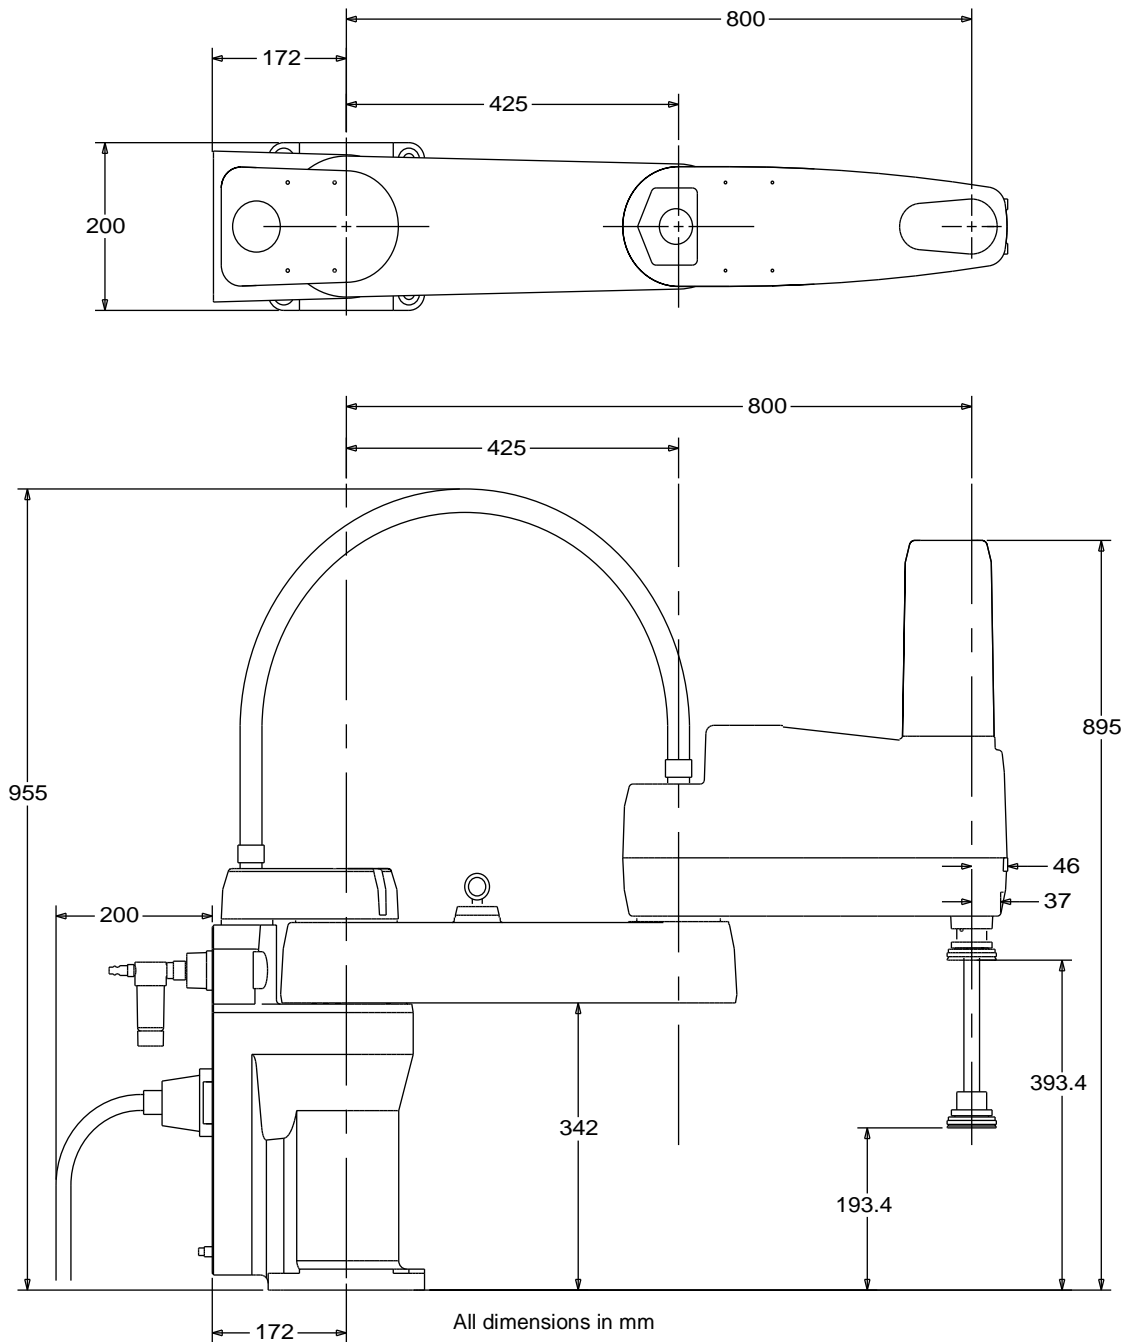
Adept Cobra 800 Robot Top and Side Dimensions
